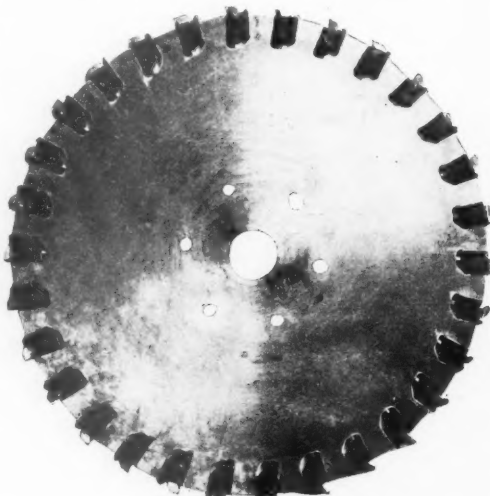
The Taylor-Newbold Metal Cutting Saw.
